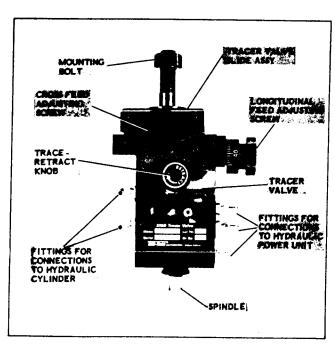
Typical 1066 Tracer Valve with 4049 Valve Slide Assembly. (Used with Mark IIA thru VI Series)
